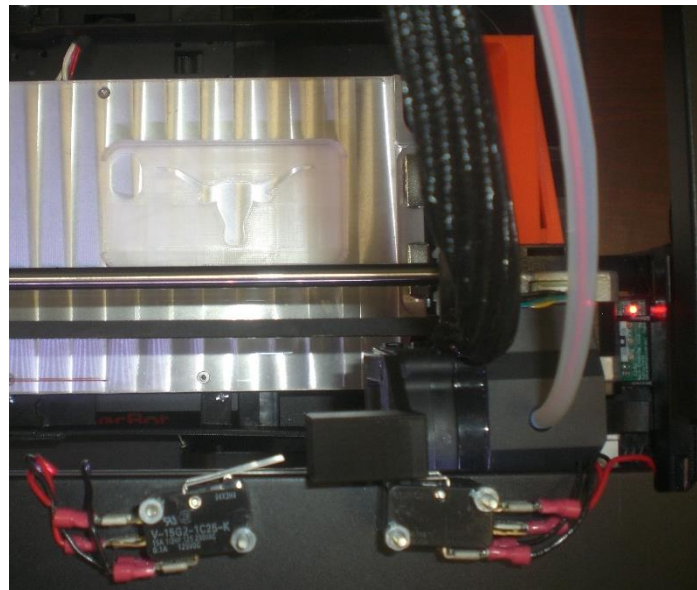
Printer head activating switches that turn on the fan and move the sweeper
